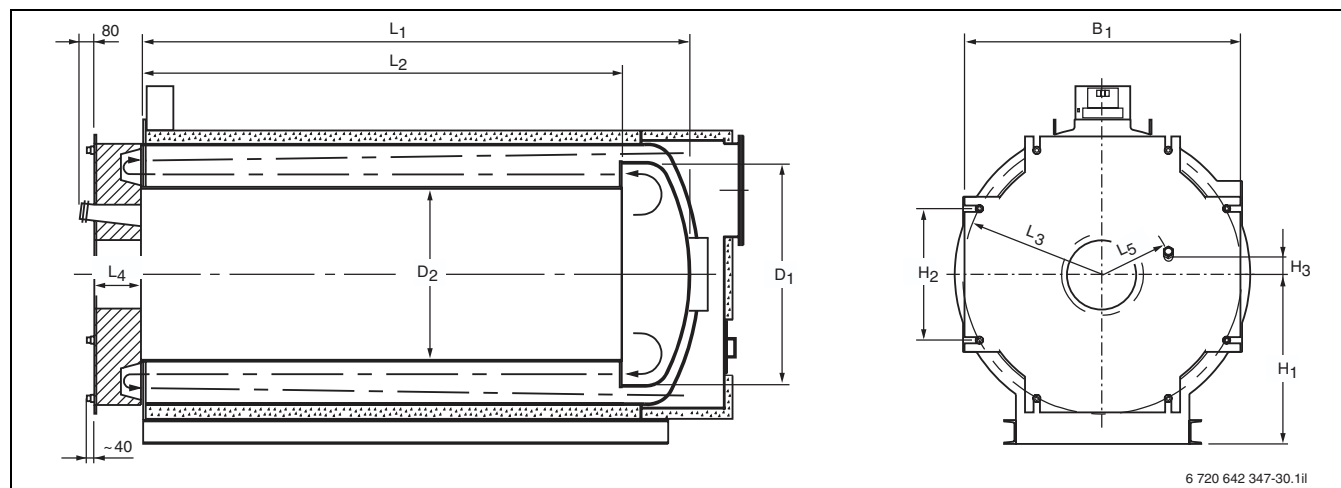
Combustion chamber dimensions Logano S825L LN, boiler sizes 4250 to 17500 (dim. in mm)
